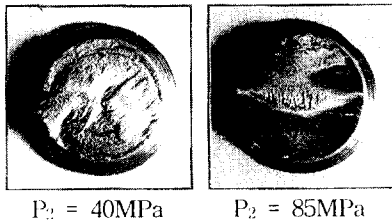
Shear fracture surfaces(Mag. 1.1)
